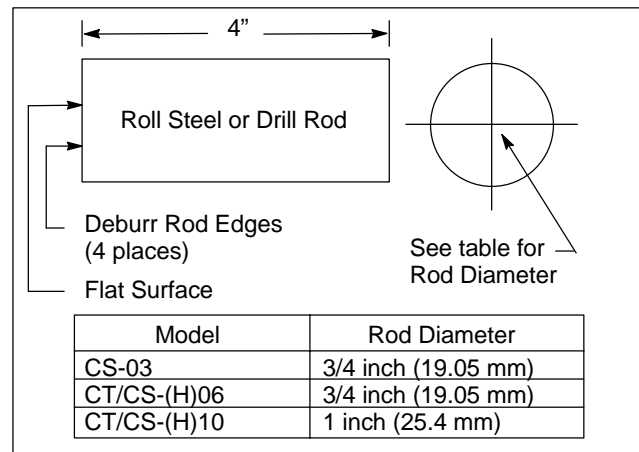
Disassembly Tool to Remove Seat (19) from Body (21)
